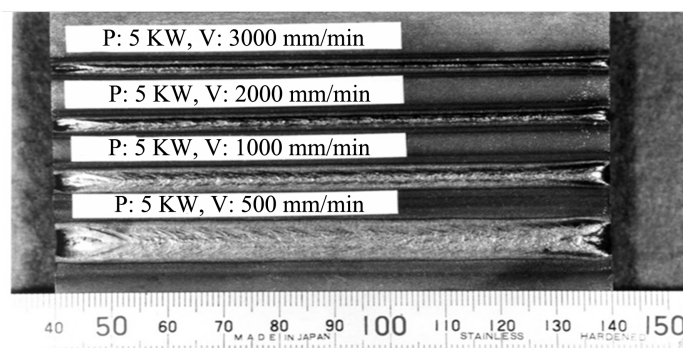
BOP image of the welded JIS G3106 SM570 plate.
